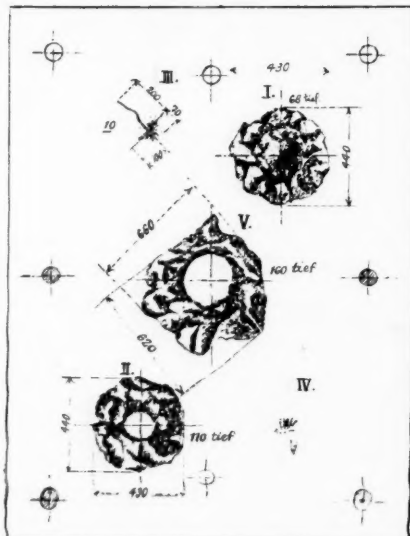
DILLINGEN & Co. DIMENSIONS, 7 FT. X 6 FT. X 10.8 INS.
